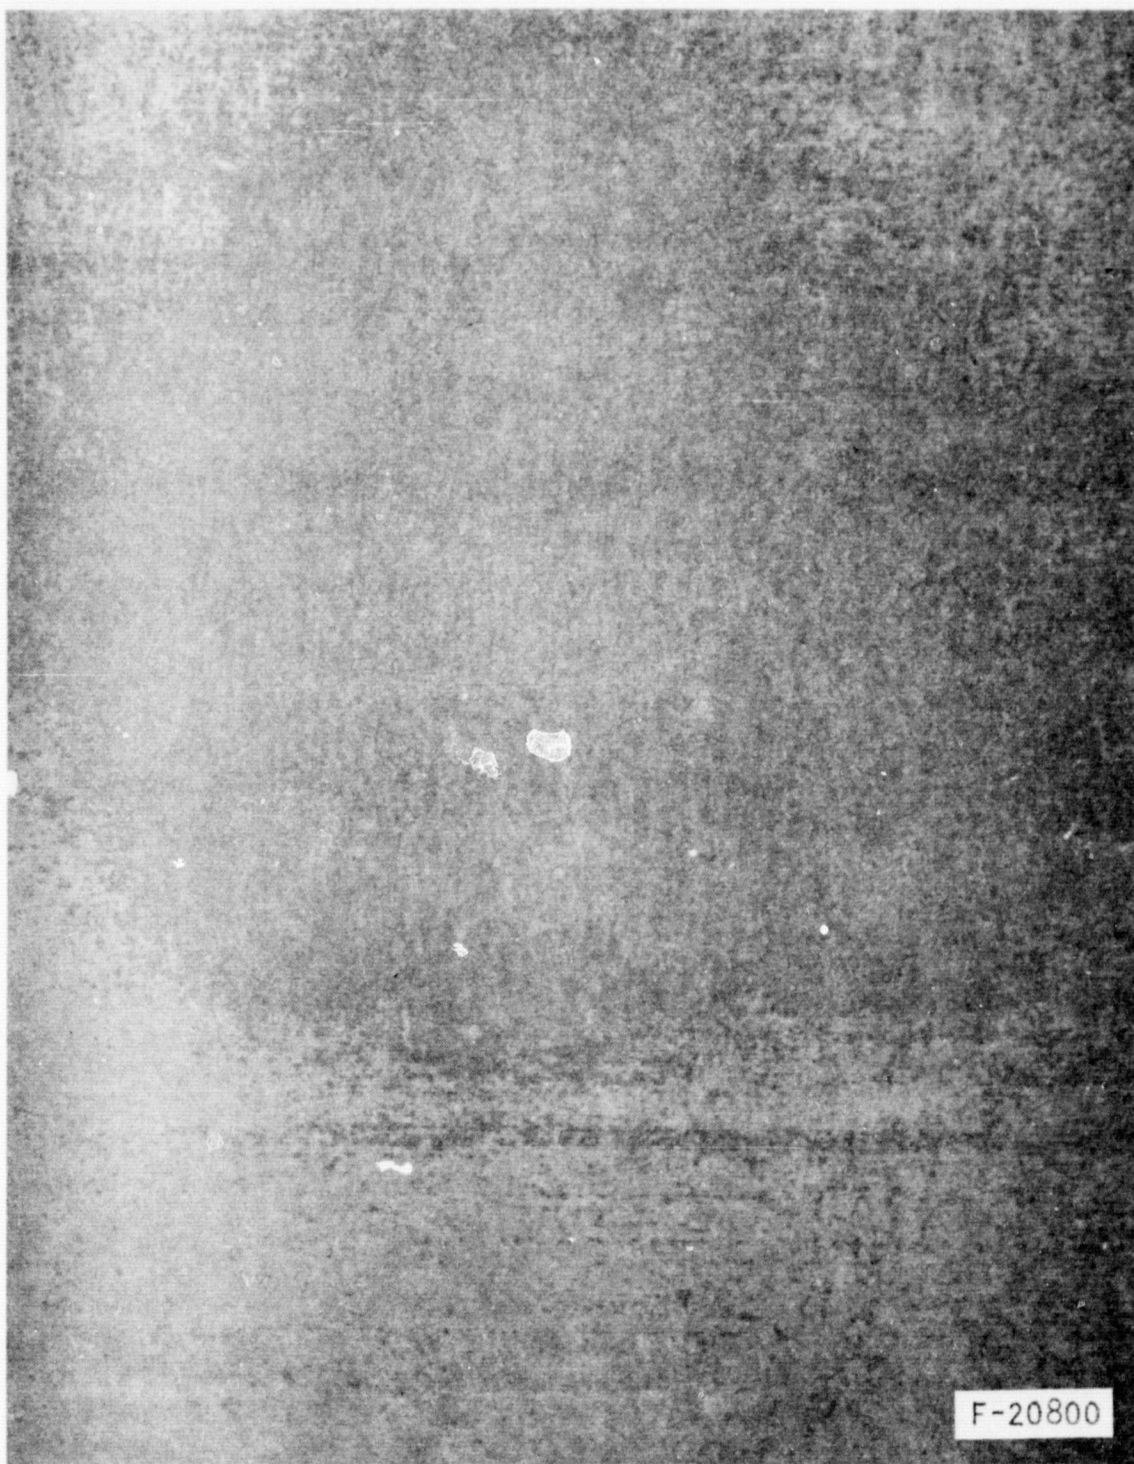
Specimen R32, Gold Plated, Before Testing. The gold plating has so covered the fissure that it has become almost invisible.
